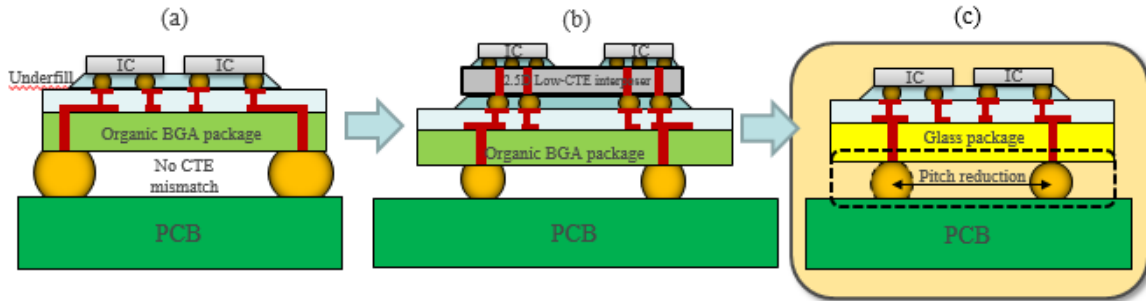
Traditional package approach (a) IC – organic BGA – PCB, current package (b) IC – low-CTE interposer – organic BGA – PCB, and new package approach (c) IC – large and thin glass package – PCB.
